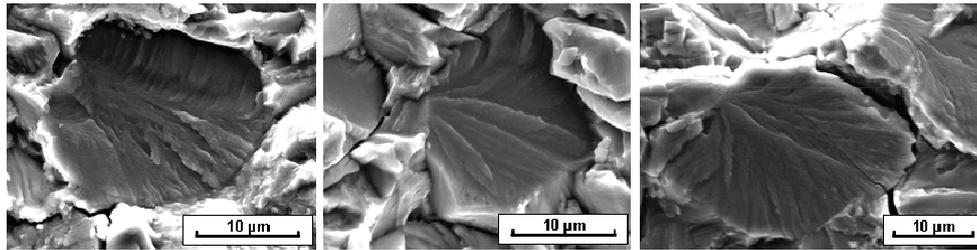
Transcrystalline fracture planes observed in the fracture surface of pancake RA; near-threshold,  $R = 0.3$
